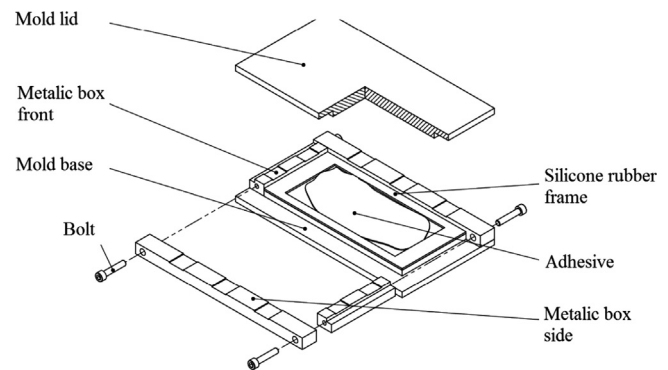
Exploded view of the mould to produce plate specimens under hydrostatic pressure.
